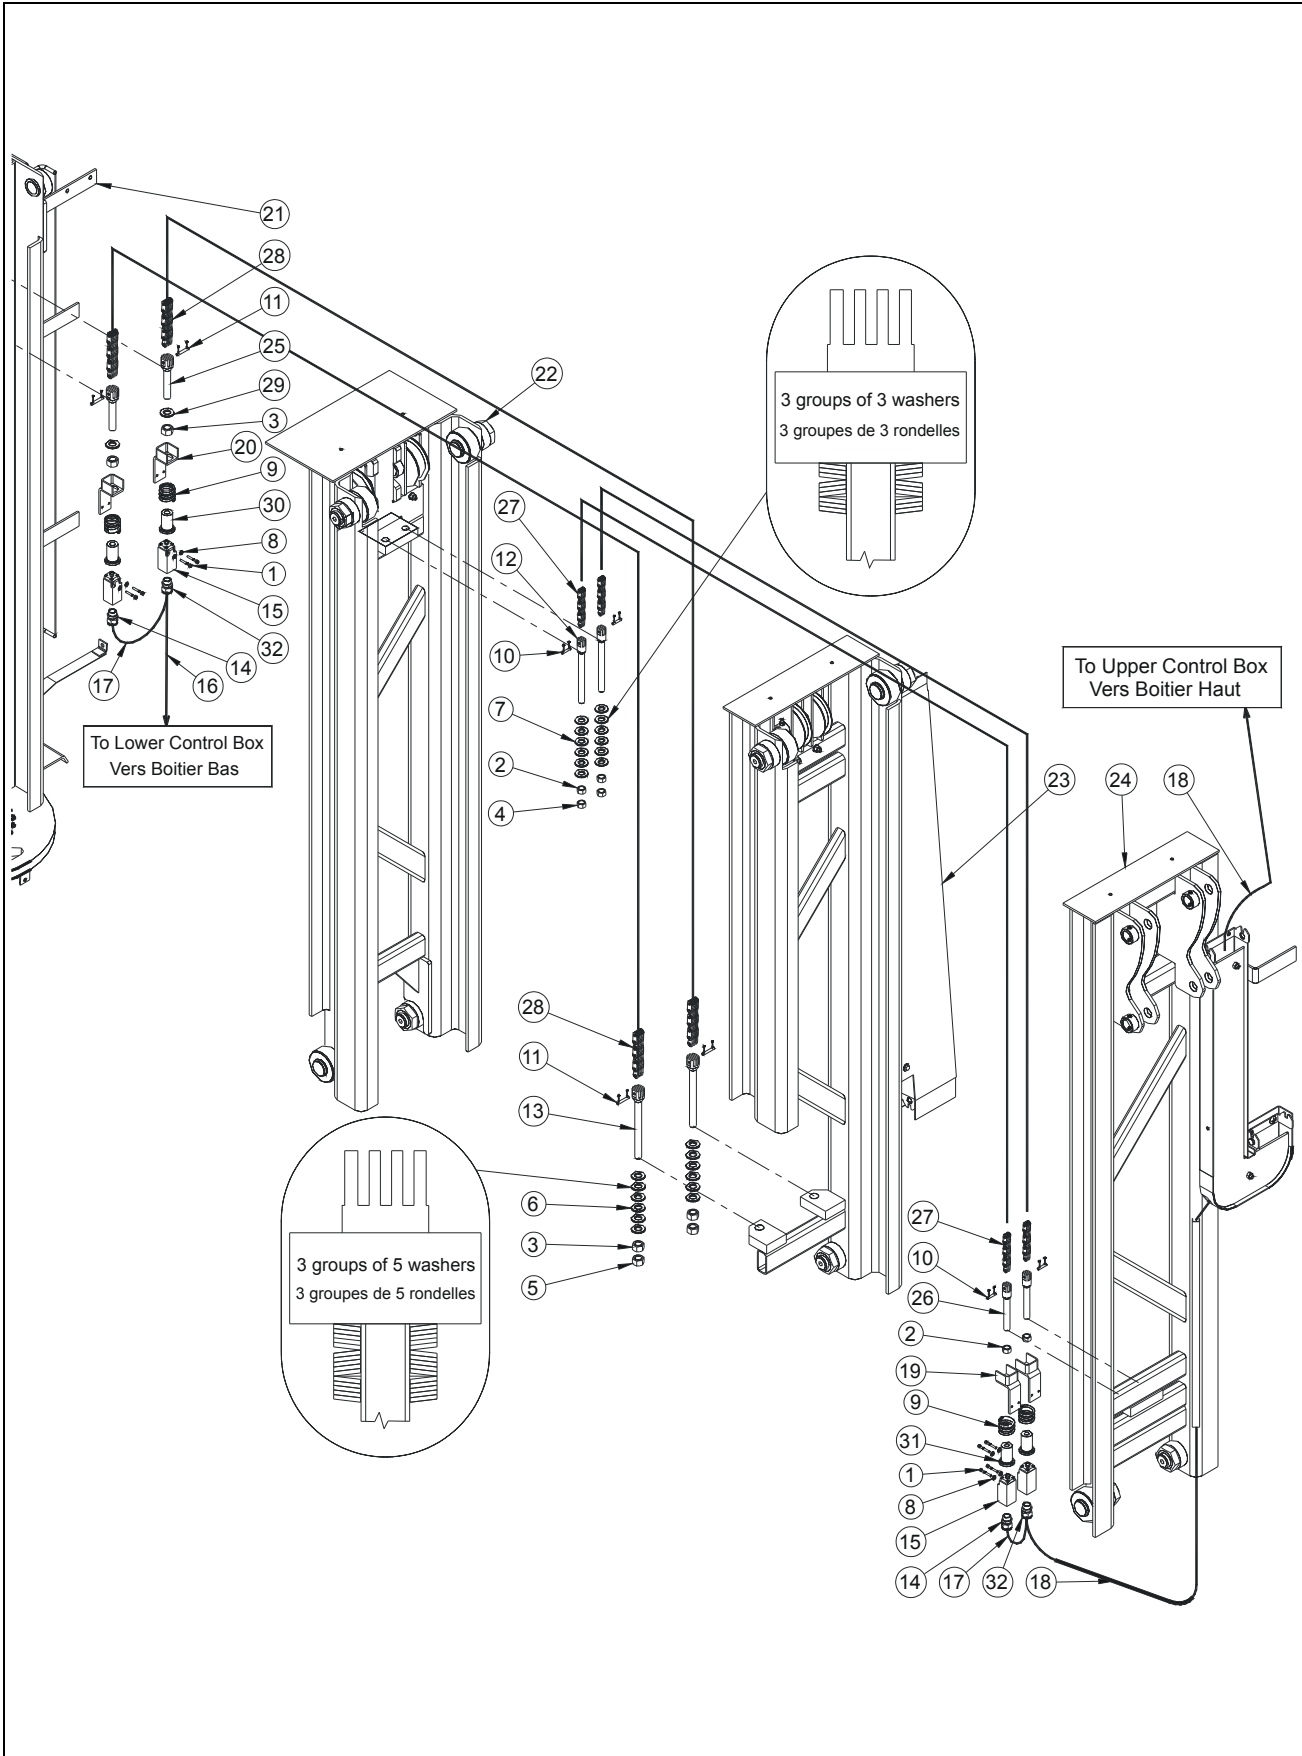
SAFETY MANIFOLD ASSEMBLY / ASSEMBLAGE BLOC DE SECURITE (CONTINUED)
